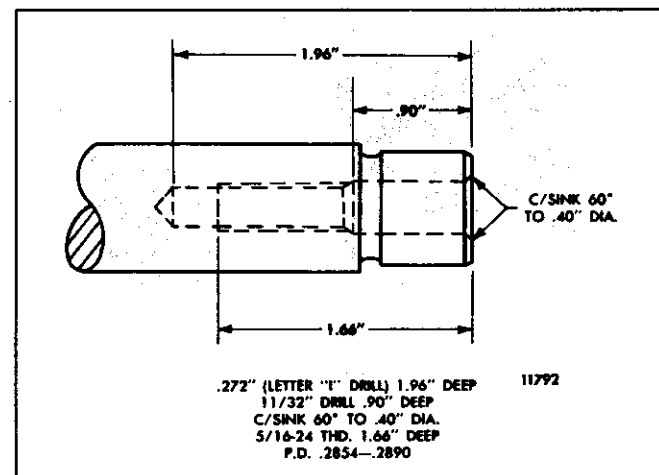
Dimensions for Reworking 6V Blower Rotor Shafts
